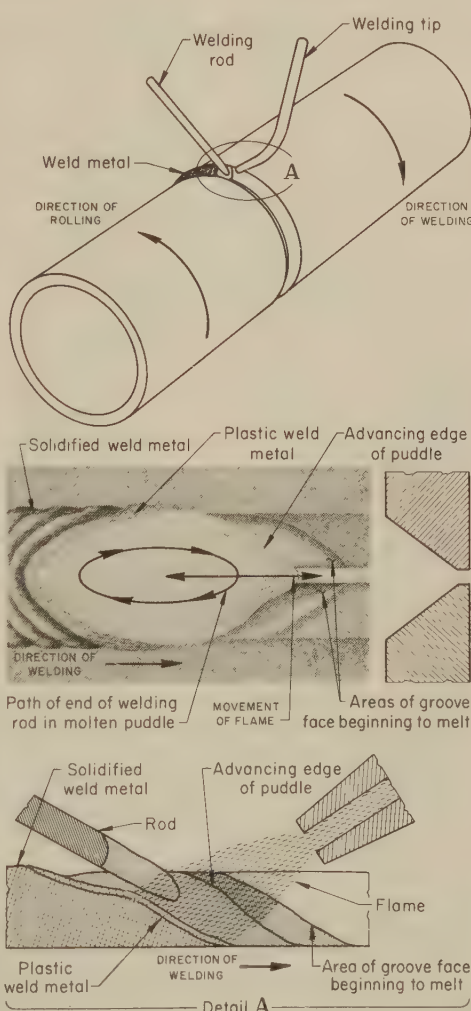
Positions and movements of welding rod and flame in backhand technique used to butt weld pipe in the horizontal-rolled position
